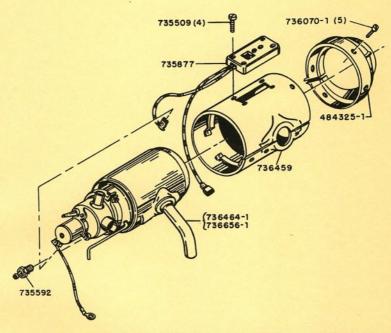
HEATER ASSEMBLY FOR KIT MODELS 8342-8343 (736478) 8345-8346 (736653)
